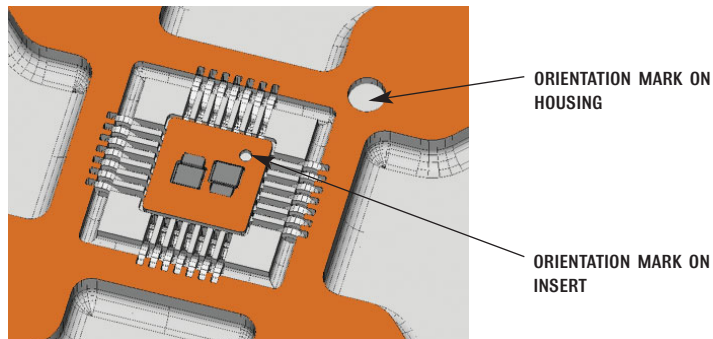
VIEW FROM THE LOAD BOARD SIDE OF THE CONTACTOR.
